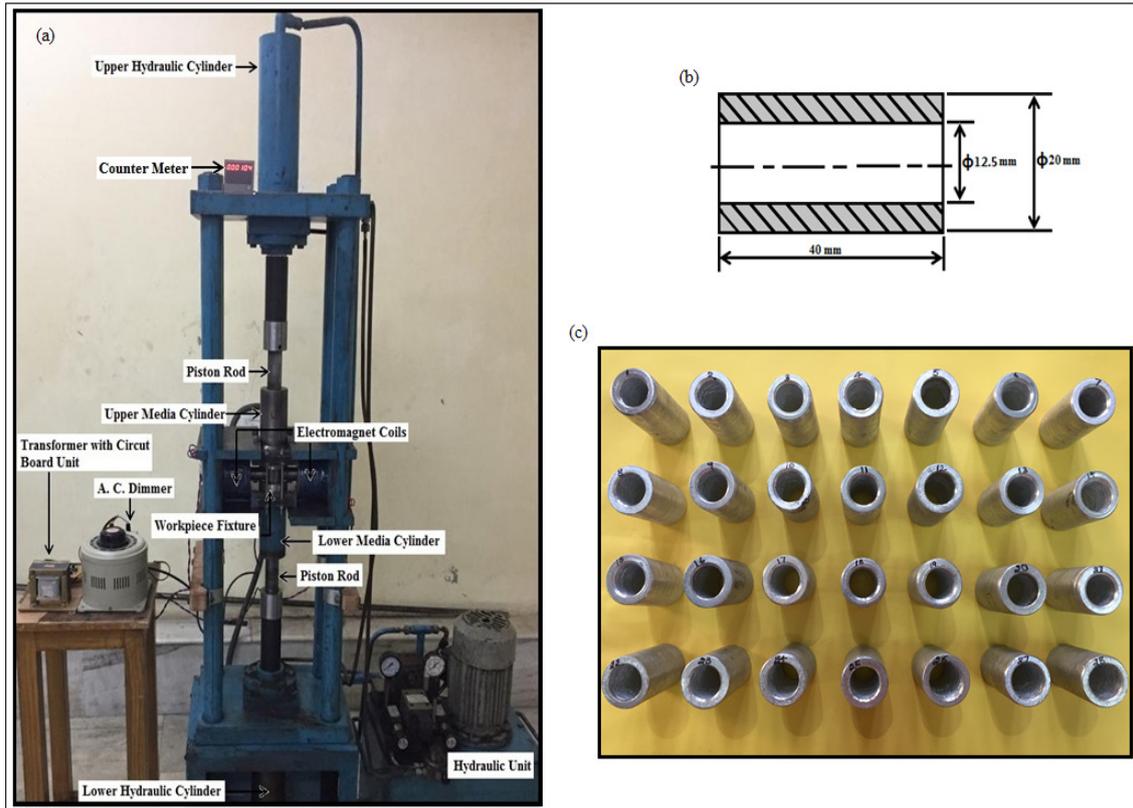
(a) Developed MAFM machining setup, (b) job profile, (c) finished workpieces.
